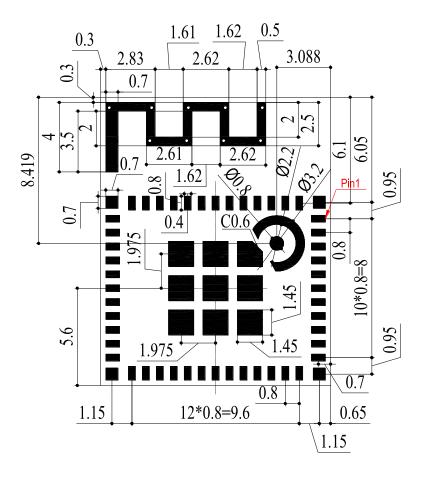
FGM842D-P Bottom Dimensions (Bottom View)
